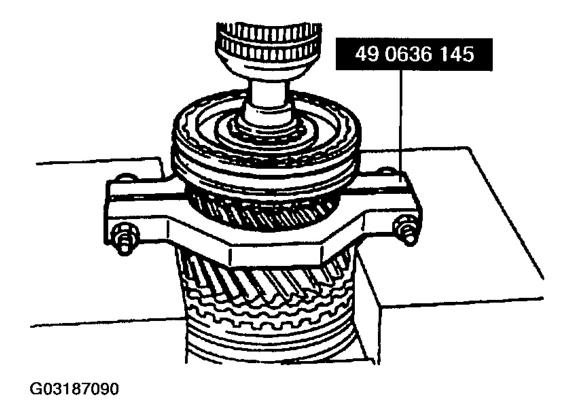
Installing SST Between 2nd & 3rd Gears Courtesy of MAZDA MOTORS CORP.
